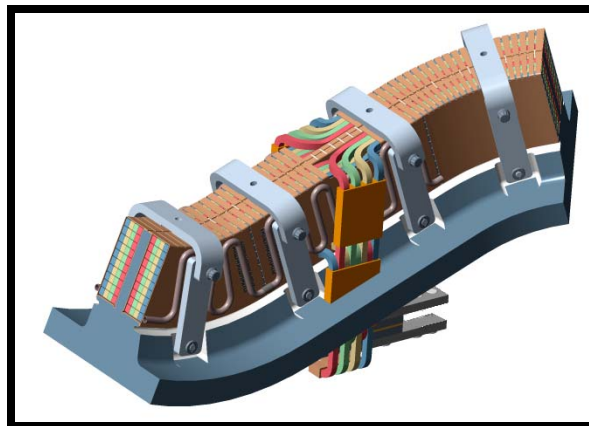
Mod Coil Schematic showing the winding cavity (tee), winding and clamps
